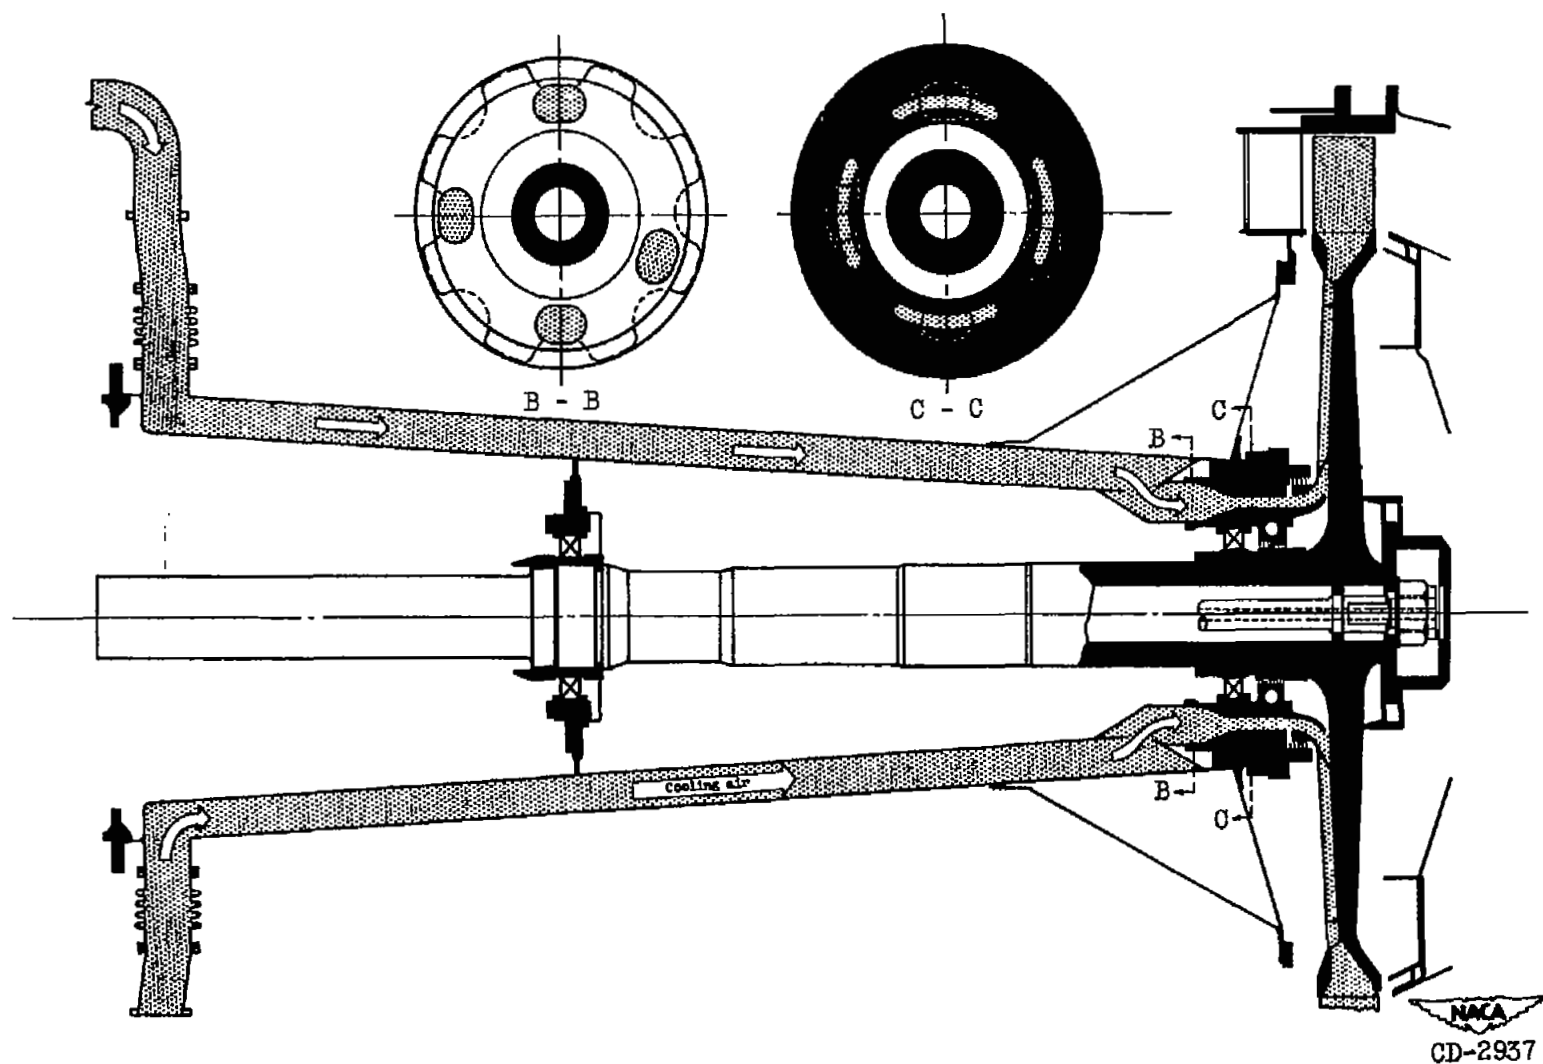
Turbine assembly showing single-disk air-cooled rotor with forward-face shroud and cooling air ducted through bearing support.
